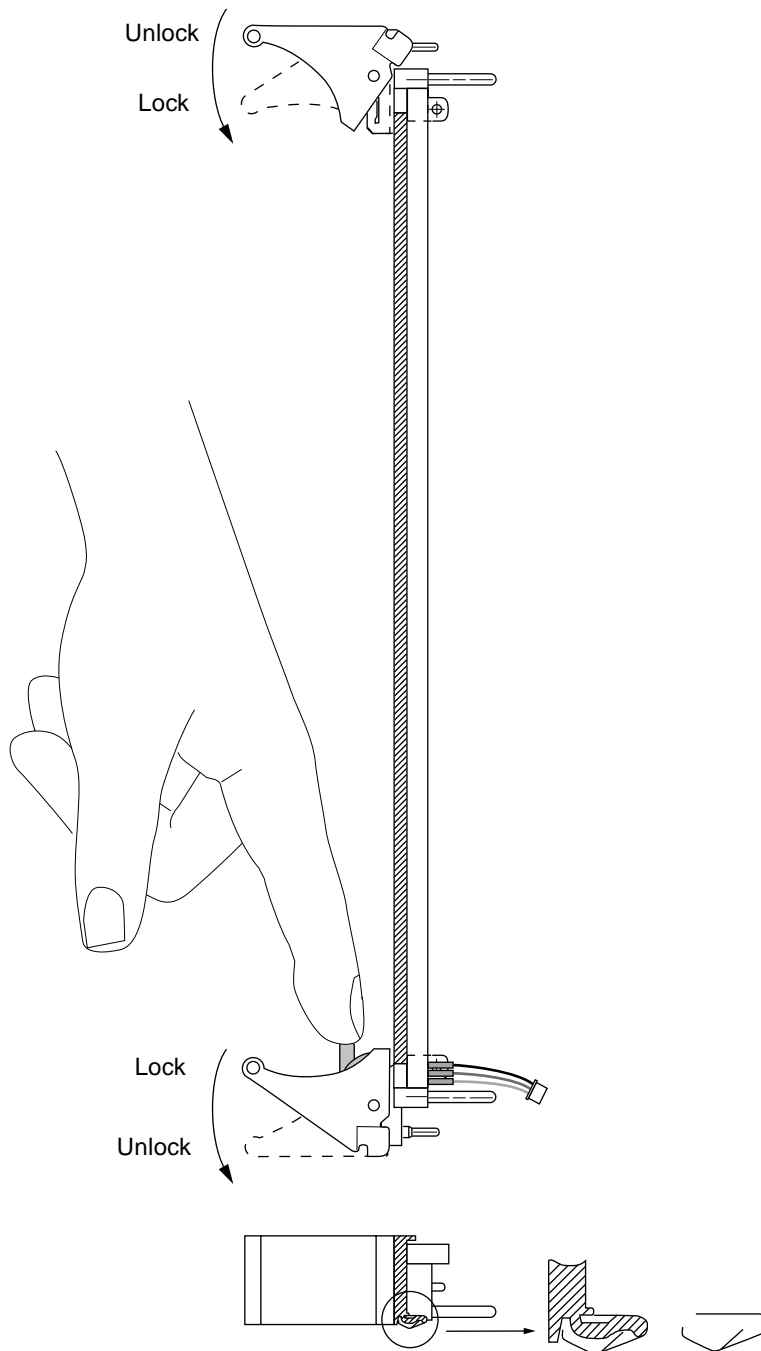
Releasing and Locking the Netra CP2140 Board Injector/Ejector Handles
